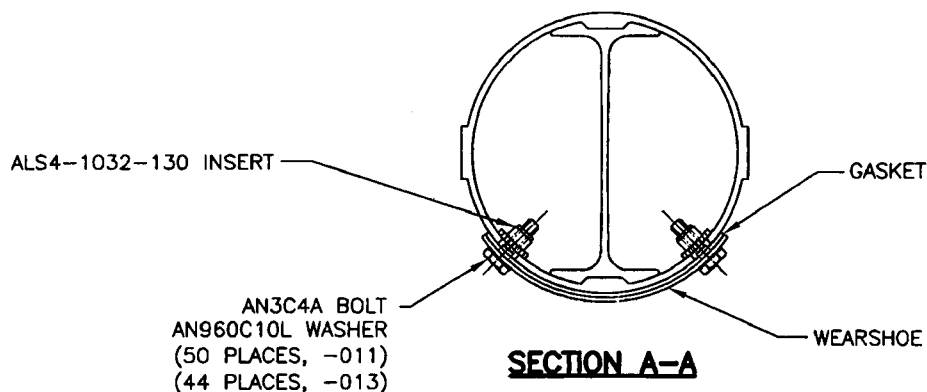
DSI9372-011/-013 WEARSHOE KIT INSTALLATION
